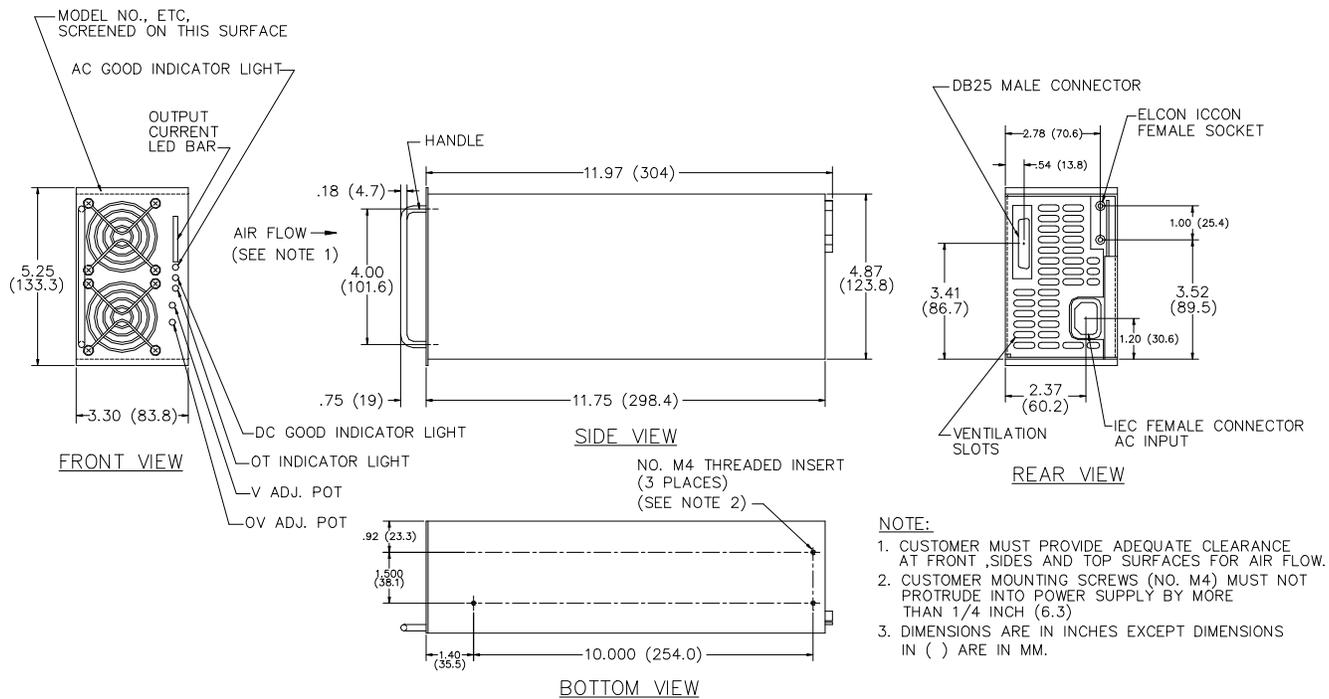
Outline Drawing of FE6K-LE Power Shelf
